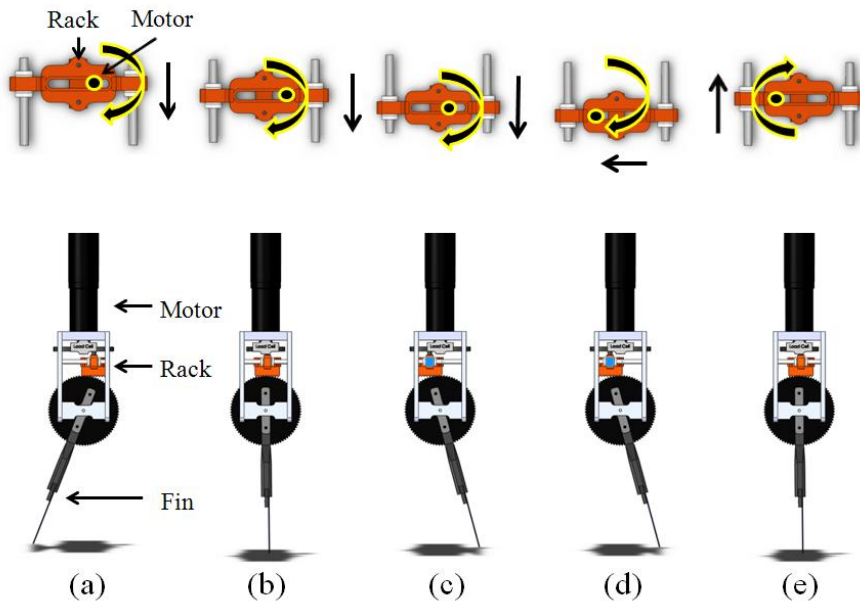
Schematic drawing of the Scotch yoke mechanism: the top is the motion of the rack, and the bottom is the movement of the tail fin when (a) the rack is in the top, (b) the rack moves to the bottom, (c) rack is in the bottom, (d) the rack changes of the direction, (e) the rack moves to the top.
